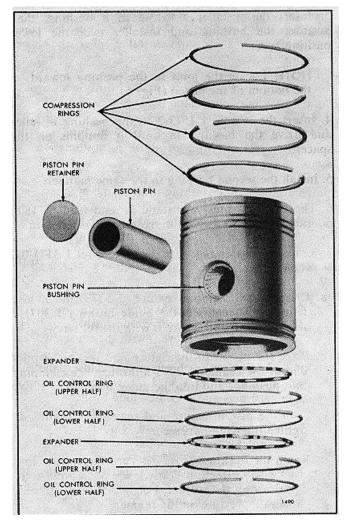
Typical Piston, Piston Rings, Pin and Relative Location of Parts
